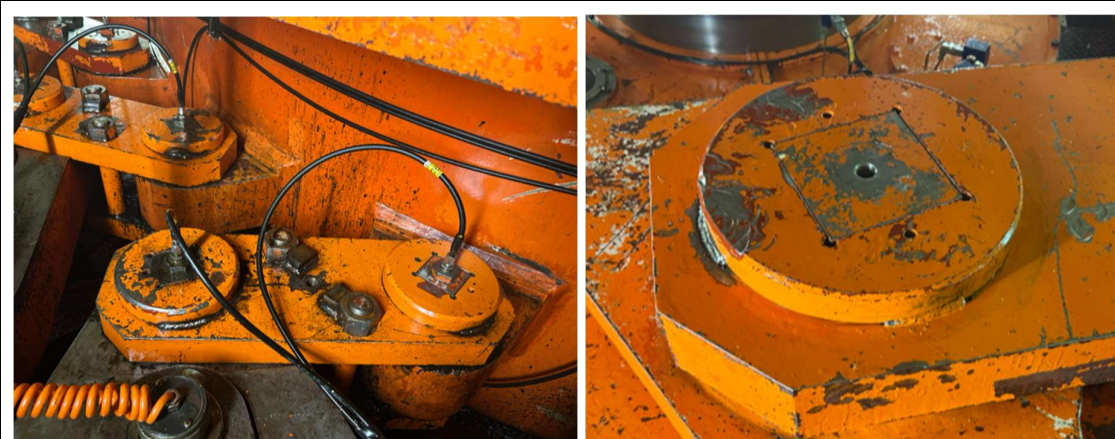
GV and Servomotor Pin Circular Locking Plates with stitch welding
